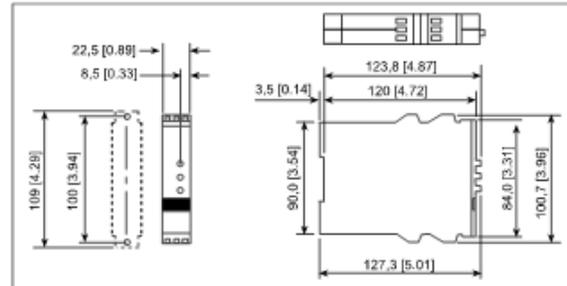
Approx. Dimensions in mm [inches] — S701\_03
